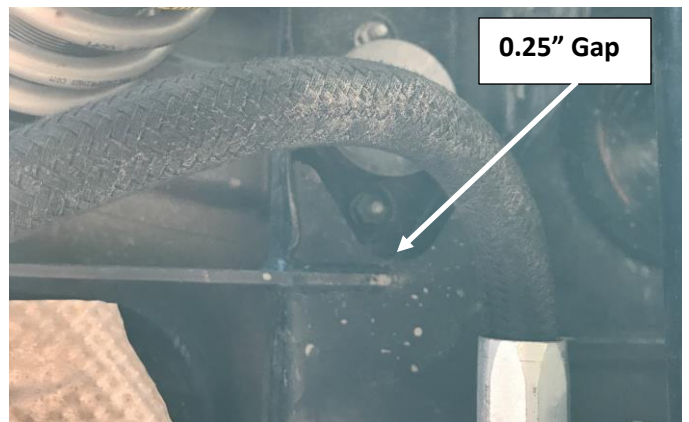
Front edge of mount is 1/4" away from cross member radius.
